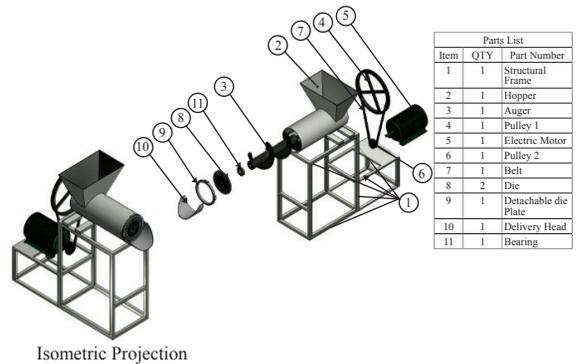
Exploded view of the varying die-plate fish feed pelletizer.
